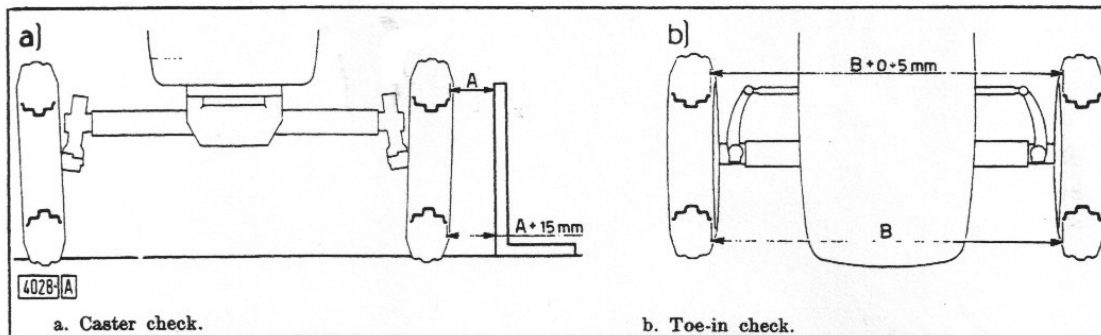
Checking front wheel alignment. (5 mm = $13/64''$; 15 mm = $19/32''$)
